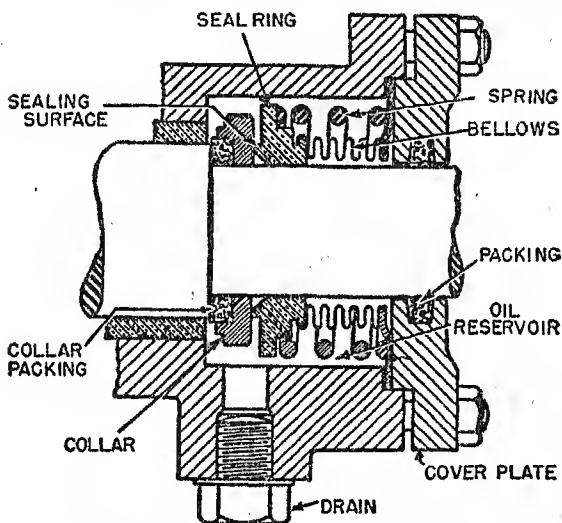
A Bellows Seal Having a Seal Ring and a Packed Collar.
